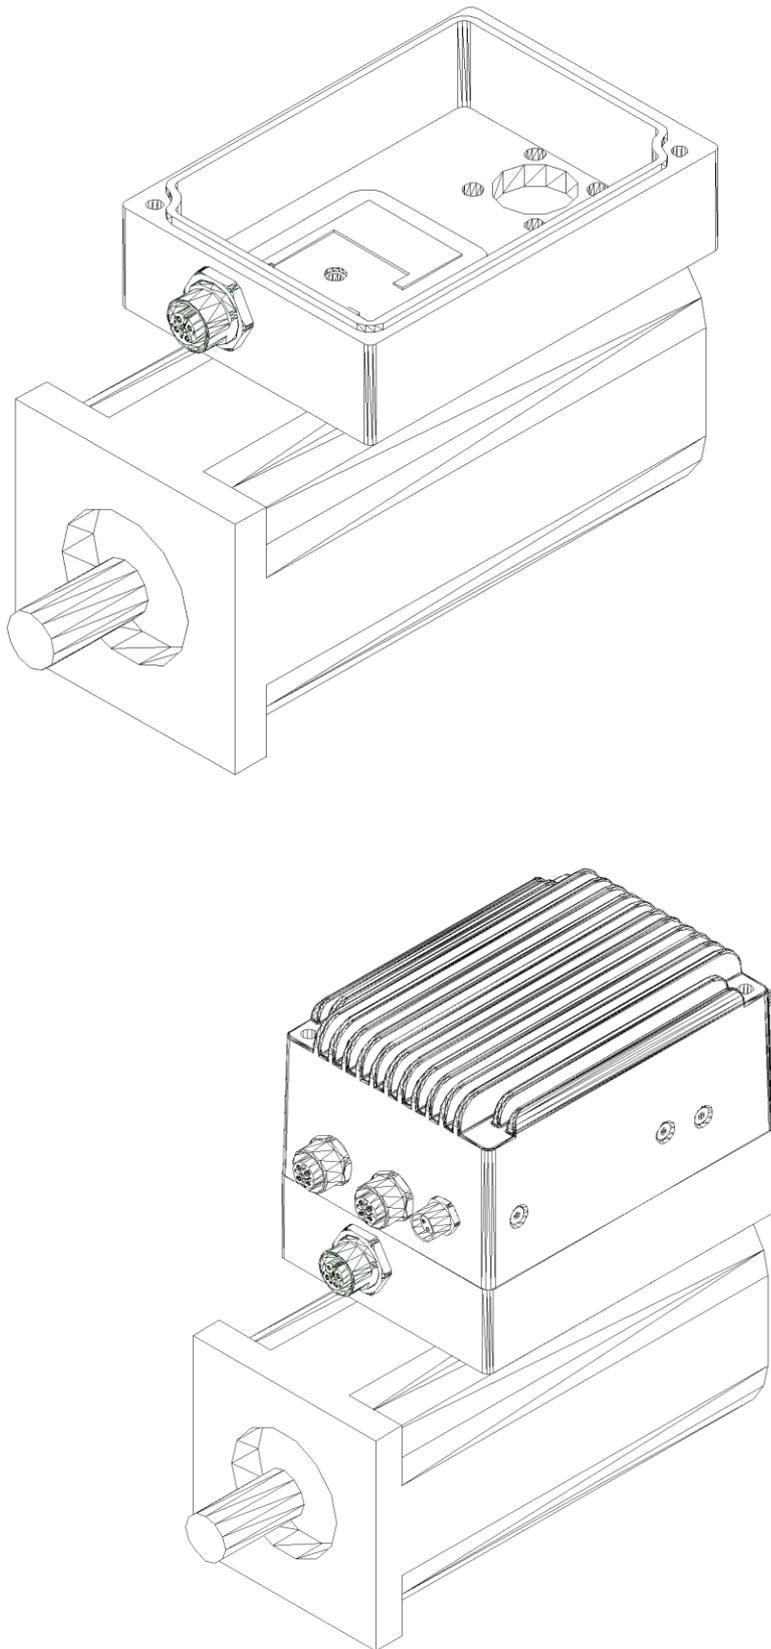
DIS-2 310/2 FB FS STO mounting example with STO – synchronous servo motor, mounting plate with brake resistor and servo drive
